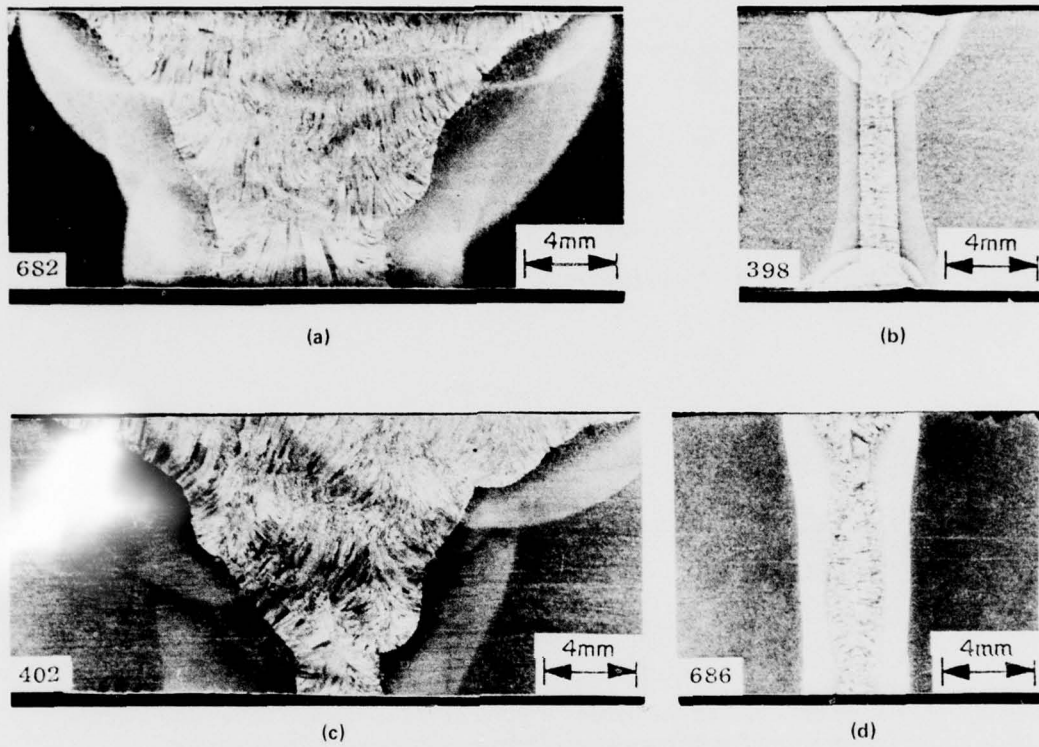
Cross-sectional views of 12.7-mm-thick HY-130 weldments etched in 10% ammonium persulphate: (A) SMA weld, (B) EB weld, (C) GMA weld, and (D) LB weld
